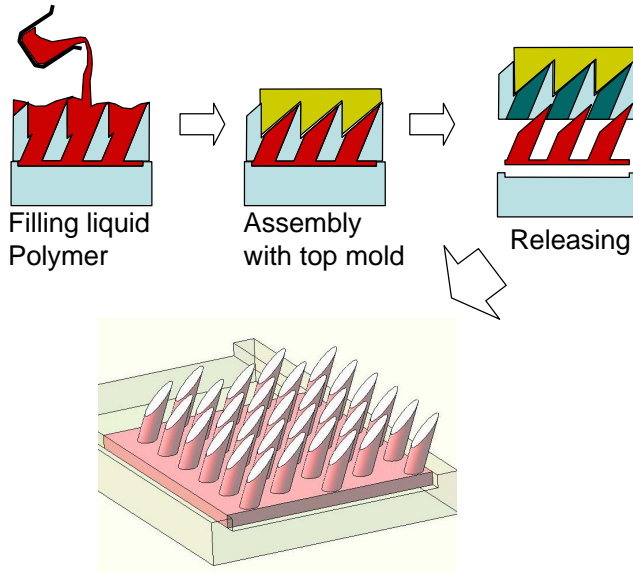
Molding process used to fabricate anisotropic patches. Mold is manufactured out of hard wax and then filled with liquid urethane polymer. Cap eliminates contact with air and creates final tip geometry.
